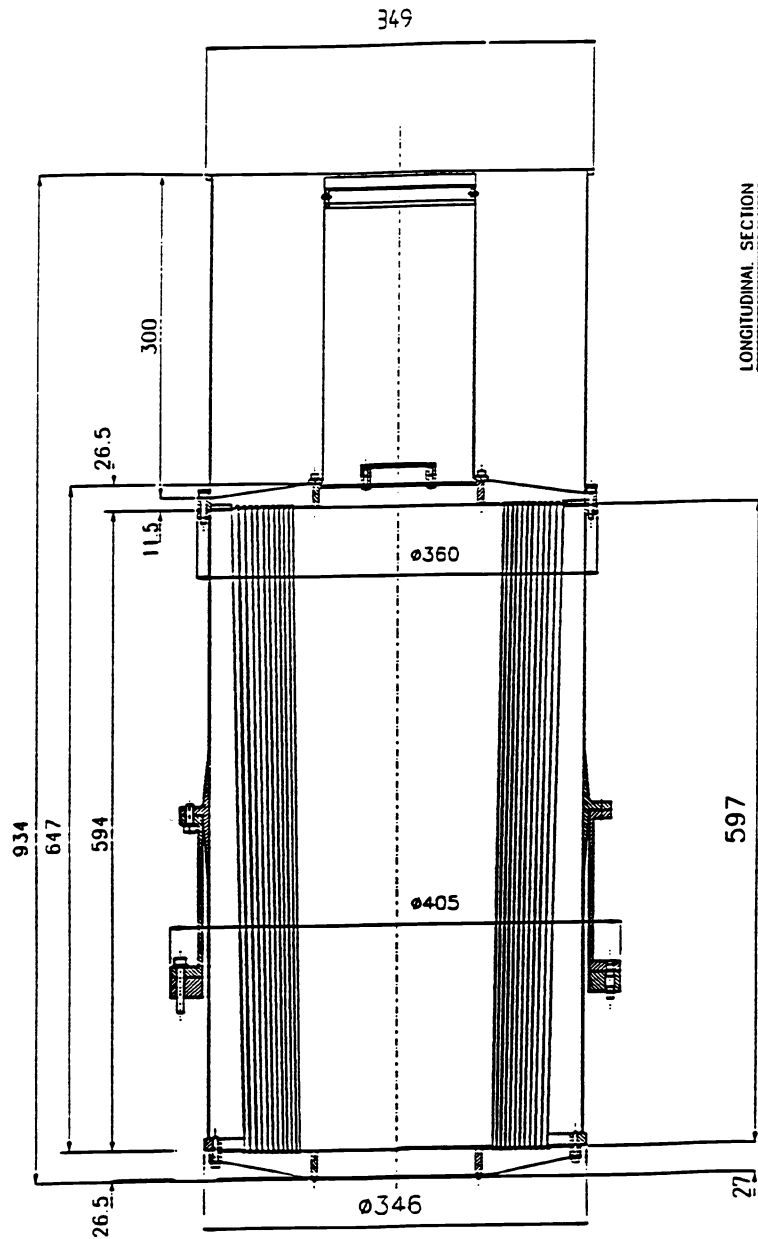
Assembly drawing of the JET-X X-ray optics.
